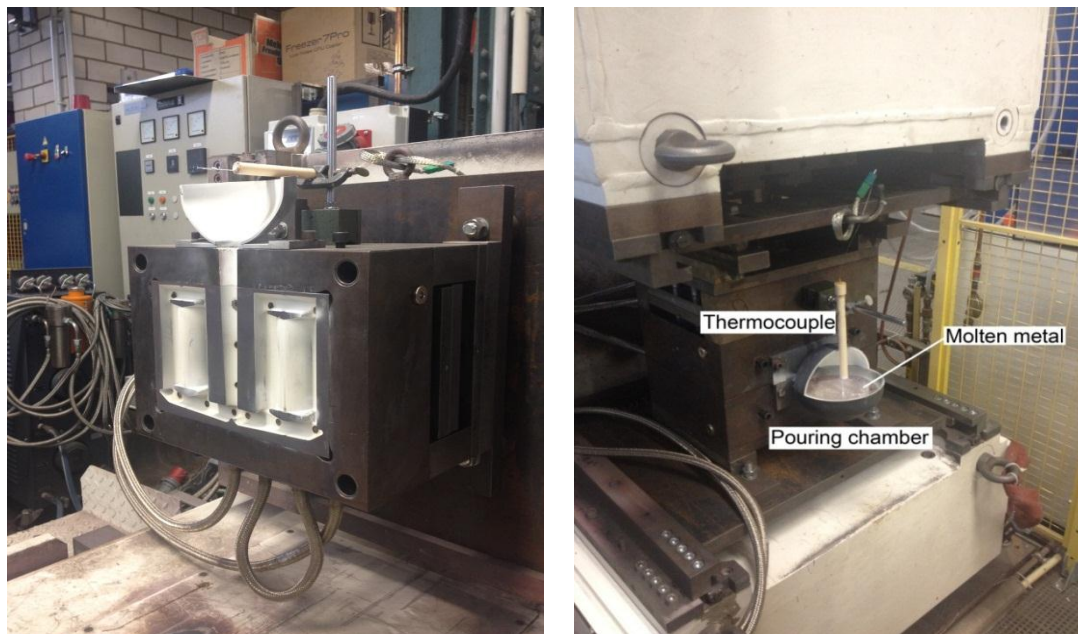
The Bolt test die on tilt casting machine (pouring position) and pouring chamber (loading position)
